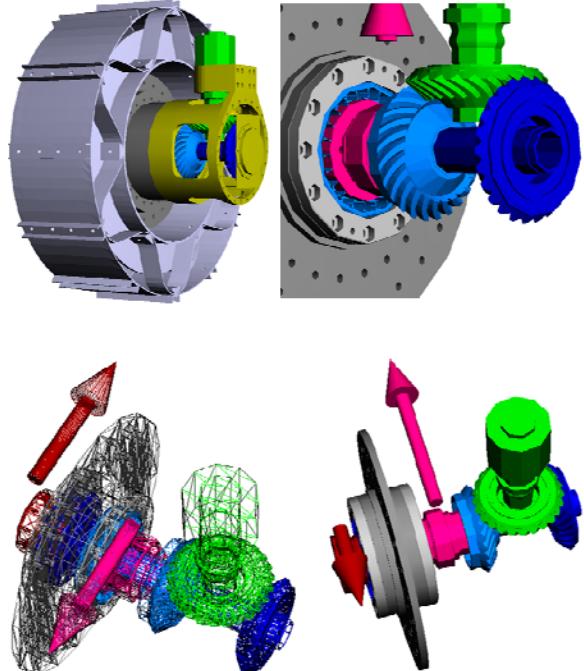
Combined wheel driving and steering actuator. Top: attached to wheel hub (left), details of differential bevel gear (right). Bottom: views taken from kinematic animation, grid model view (left), shaded surface model view (right); the two arrows correspond to the output angular rate selected for each of the two motors.
